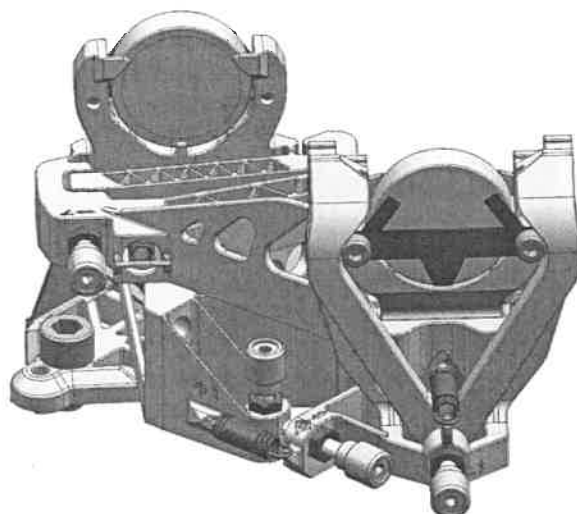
Isometric view of resulting design for two-mirror adjustment module
